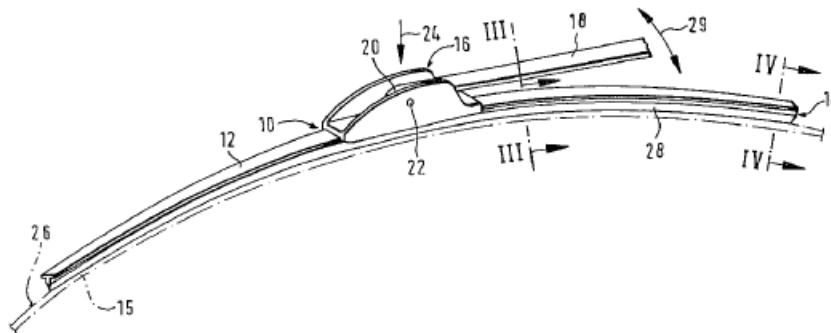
of the '698 patent showing a perspective view of a wiper blade connected to a wiper arm
